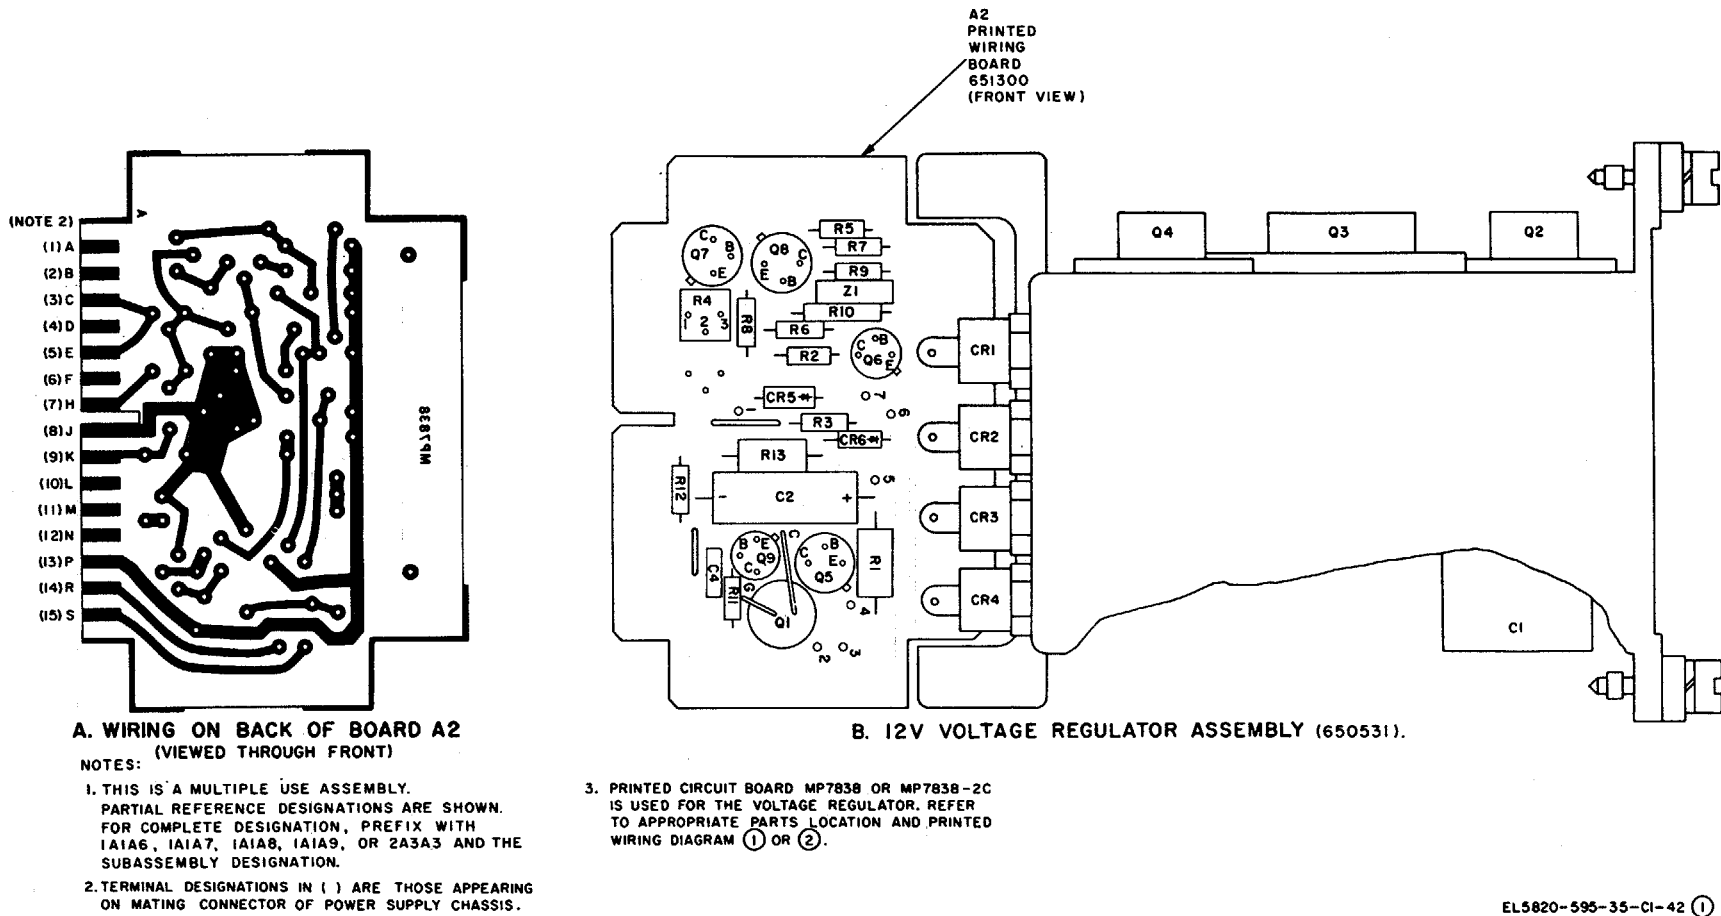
(1). 12v regulator 1A1A6 through 1A1A9 and 2A3A3, parts location and printed wiring diagram.
